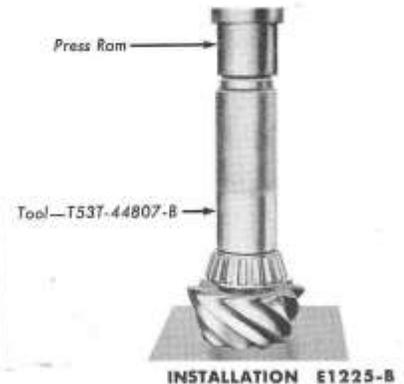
Pinion Rear Bearing Cone Removal and Installation
